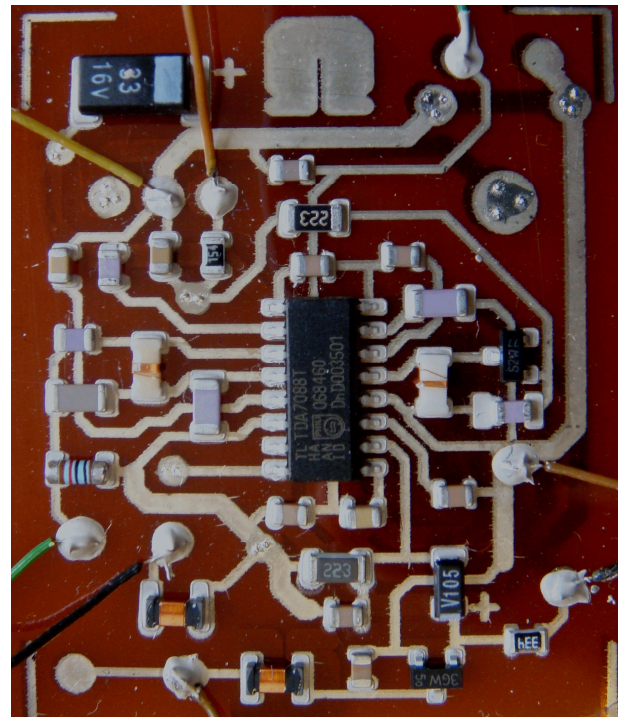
Assembled, inkjet printed double sided PCB of the Ohm radio
